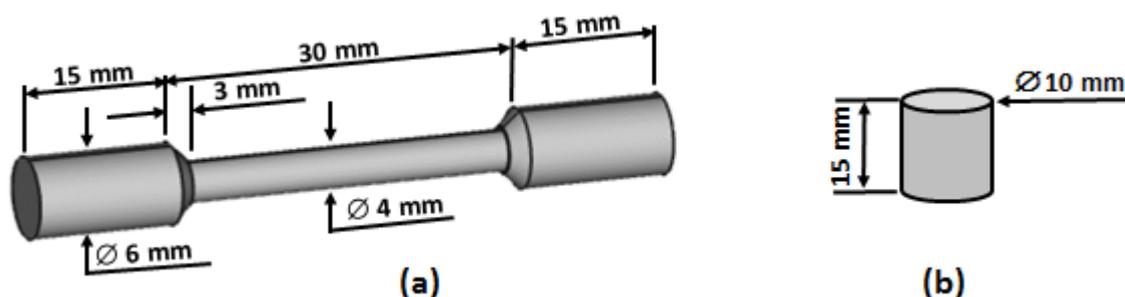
Samples of the machined (a) tensile test specimen and (b) hardness test specimen.
